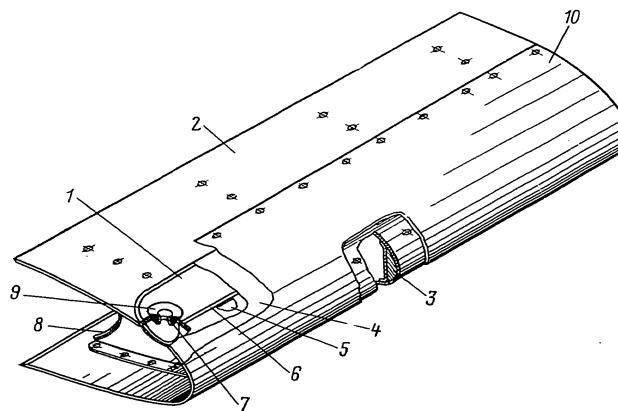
BLADE SECTION LEADING EDGE WITH ELECTRIC DE-ICER
